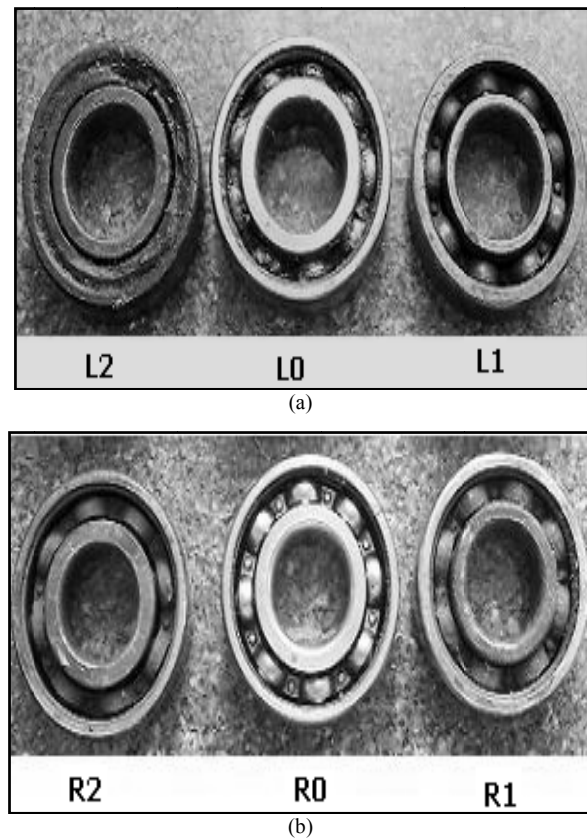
Bearings under test: (a) Load side bearings, (b) Rear side bearings
